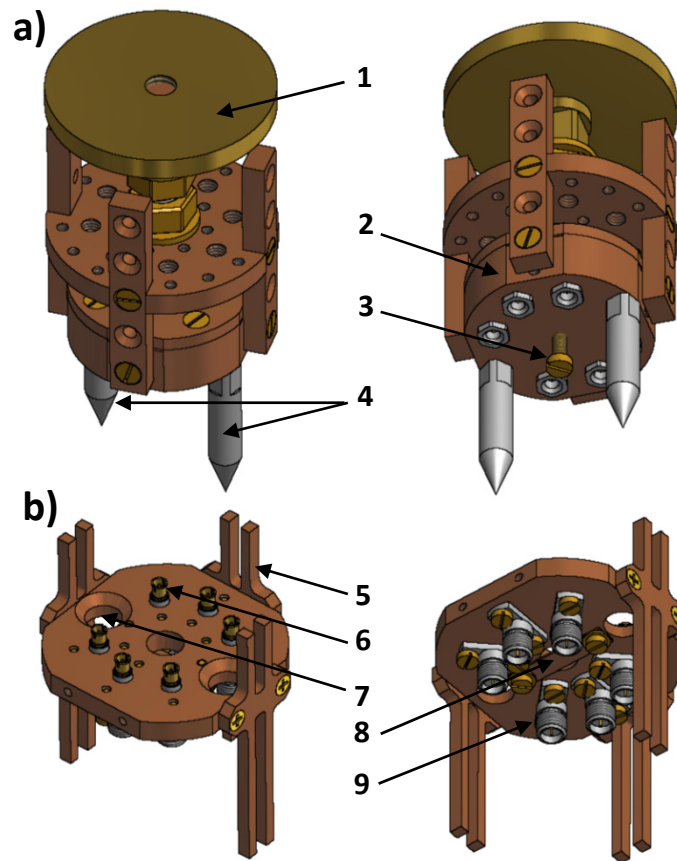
Drawings of the mechanical assemblies, seen from two point of views. The top assembly a) is attached to the end of the insertable probe, while the bottom assembly b) is permanently fixed to the mixing chamber of the refrigerator. 1: cold end of probe. 2: sample holder. 3: stopper. 4: Teflon guiding rods. 5: rails, height adjustable with respect to the mixing chamber. 6: SMP-SMP adapter ("bullet"). 7: guiding hole. 8: beryllium copper strip. 9: SMP-SMA adapter.
